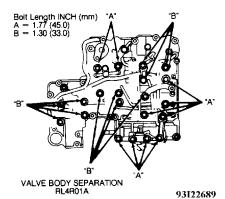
Valve Body Separation (RL4R01A) Courtesy of Nissan Motor Co., U.S.A.
